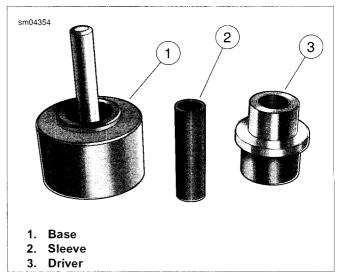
Rear Wheel Compensator Sprocket Bearing Remover/Installer (Part No. HD-48921)
